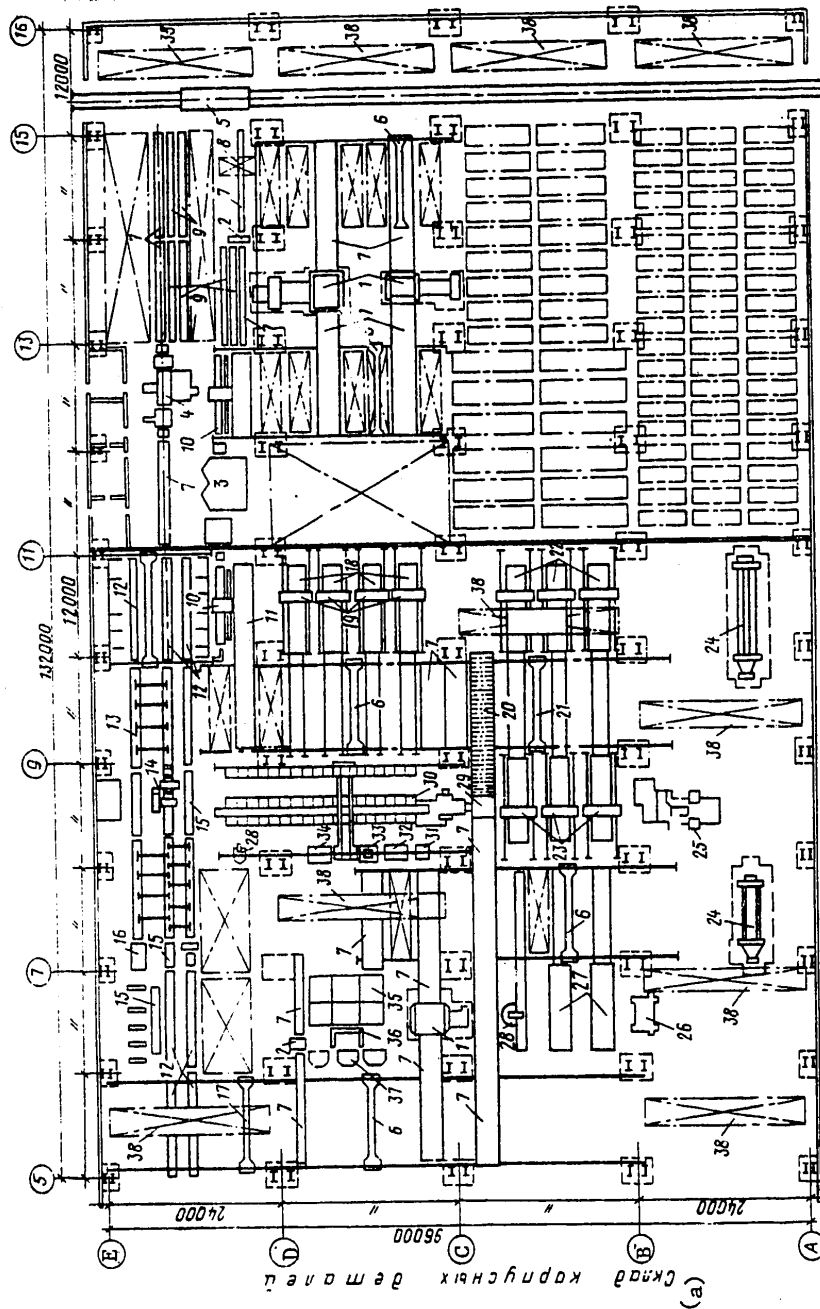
Layout of hull platers shop with steel warehouse, section for straightening, planing and priming steel at class III shipyards.
